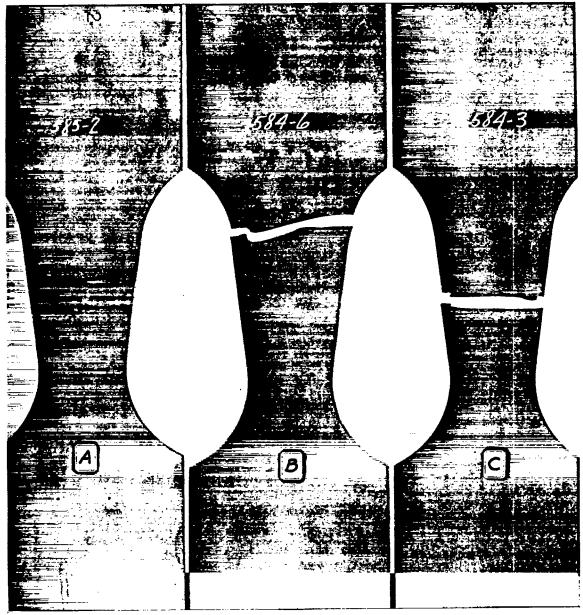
Typical plate-bending fatigue fractures at toe of weld bead (root-weld views).
